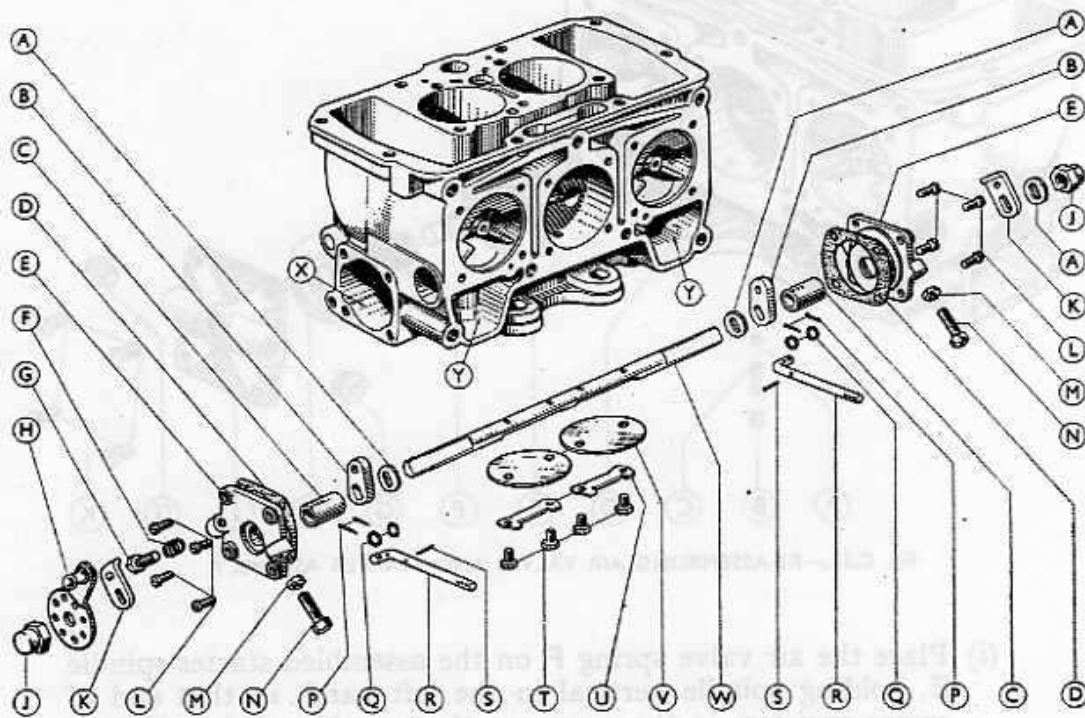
RE-ASSEMBLING THROTTLE SPINDLE.
